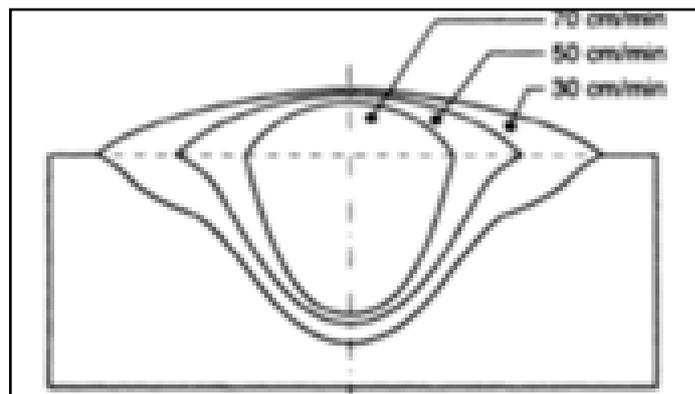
Effect of Welding Speed on Weld Bead [25]
